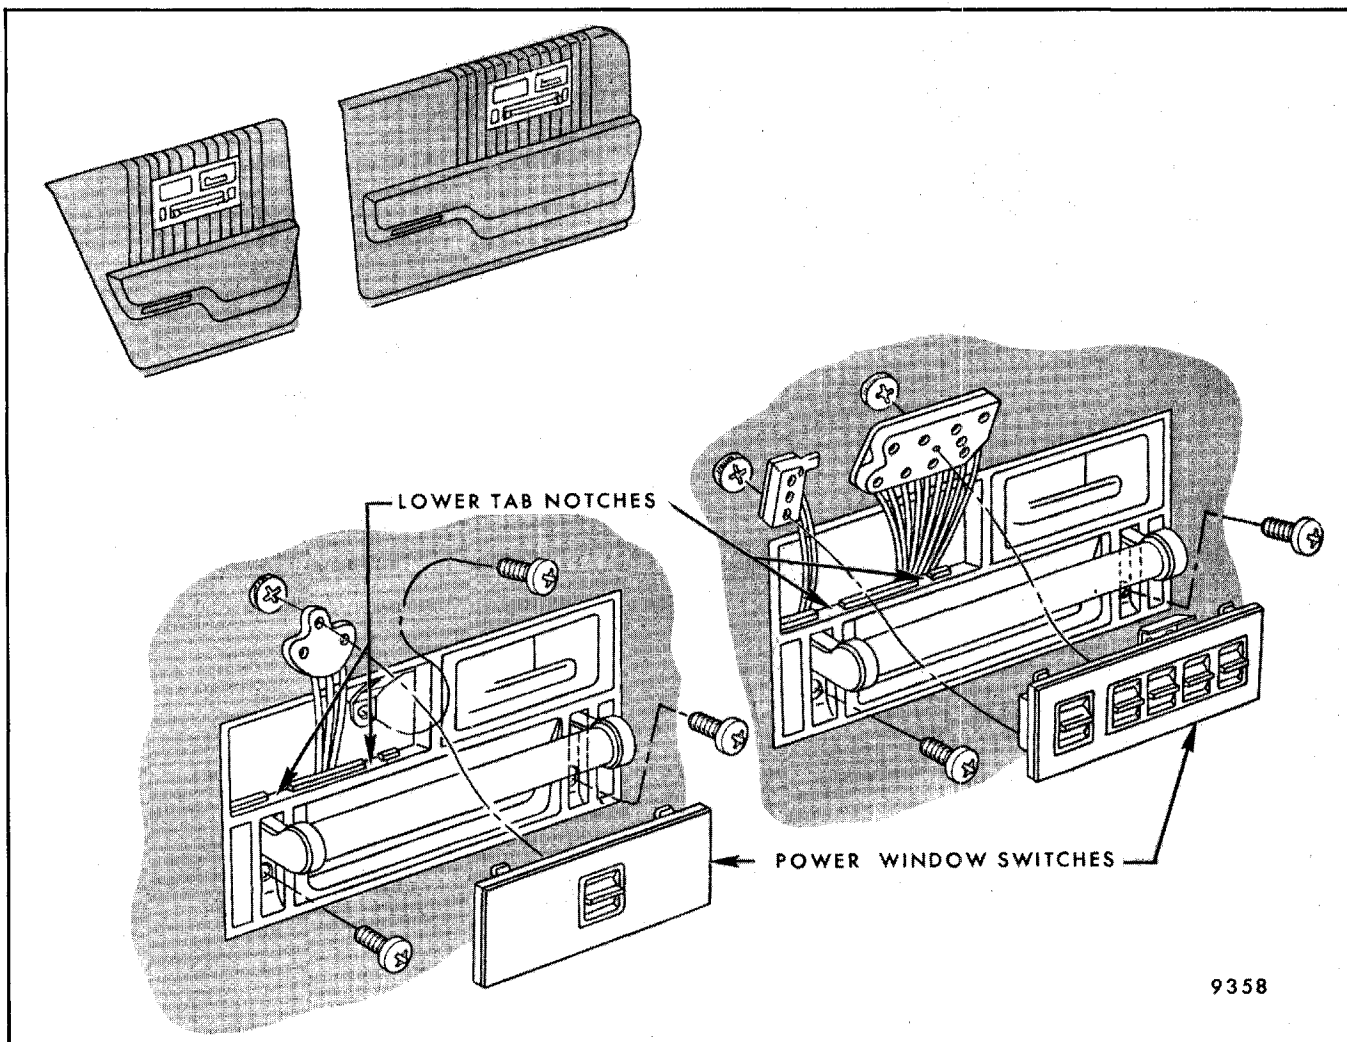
Power Window Control Switch Plate - "K" Style
